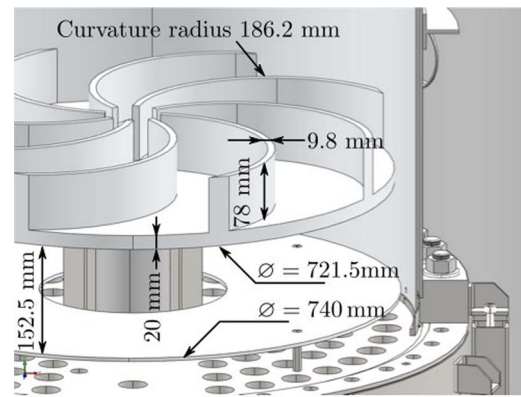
Geometry of the (lower) impeller and additional aluminium disk below.
